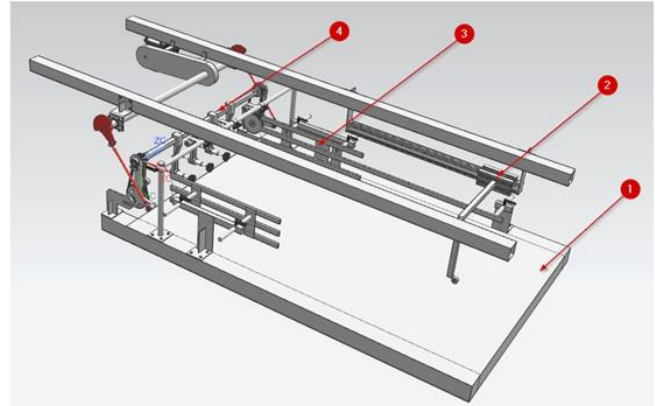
A schematic design of the modernized cardboard-blank magazine: 1 – board, 2 – guiding mechanism, 3 – positioner, 4 – blank collection system
